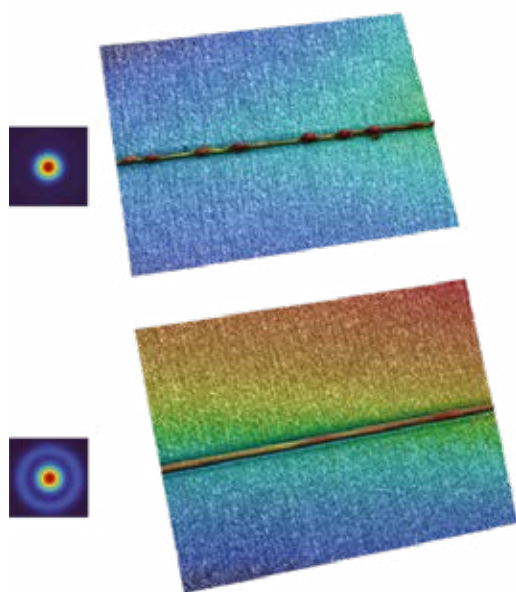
Welding of 50 μm stainless steel bipolar plates for fuel cells. Both welds were performed at 1.3 m/s and 1 kW laser power, and the images show 3.4 mm of weld seam. The humping defect is evident in the SM weld (upper) and has been eliminated in the AFX weld (lower). (Source: D. Bartels, BLZ).
